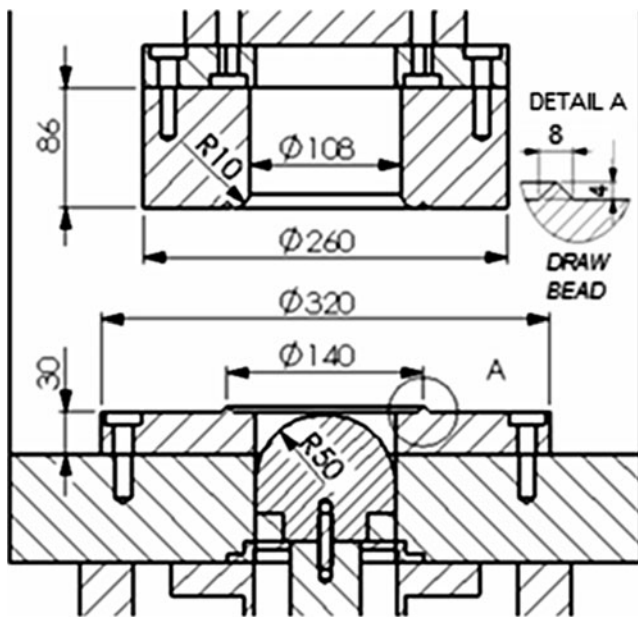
Hemispherical punch with a radius of 50 mm with drawbeads in the blankholder (dimensions in millimeters)
